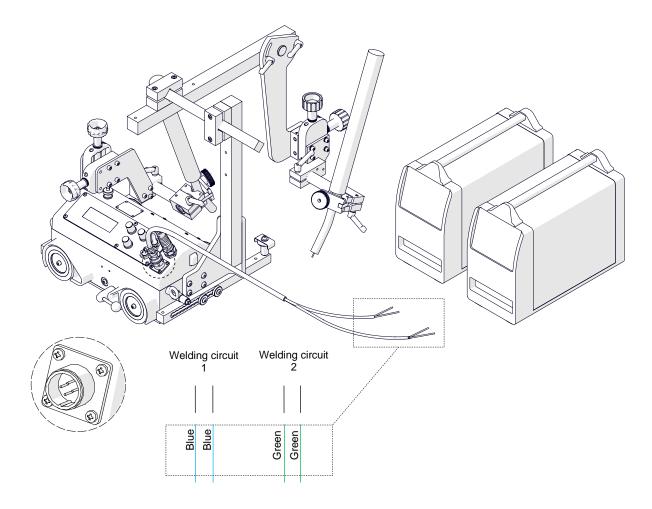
Connecting the arc ignition cable to welding circuits
